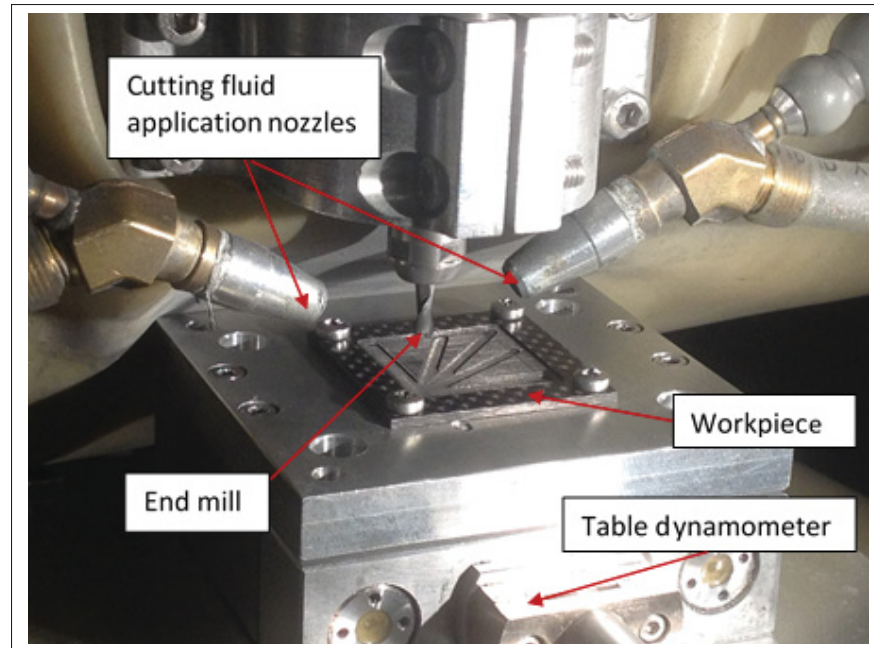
Experimental set-up consisting of a workpiece mounted on table dynamometer, end mill cutting tool and cutting fluid application nozzles
